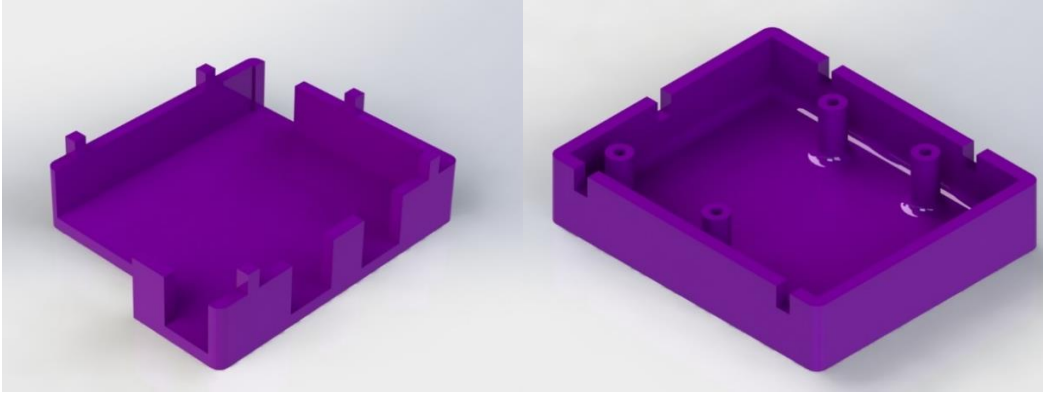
From Left to Right: Control Board Cap, Control Board Plate; Together these enclose the custom PCB.
